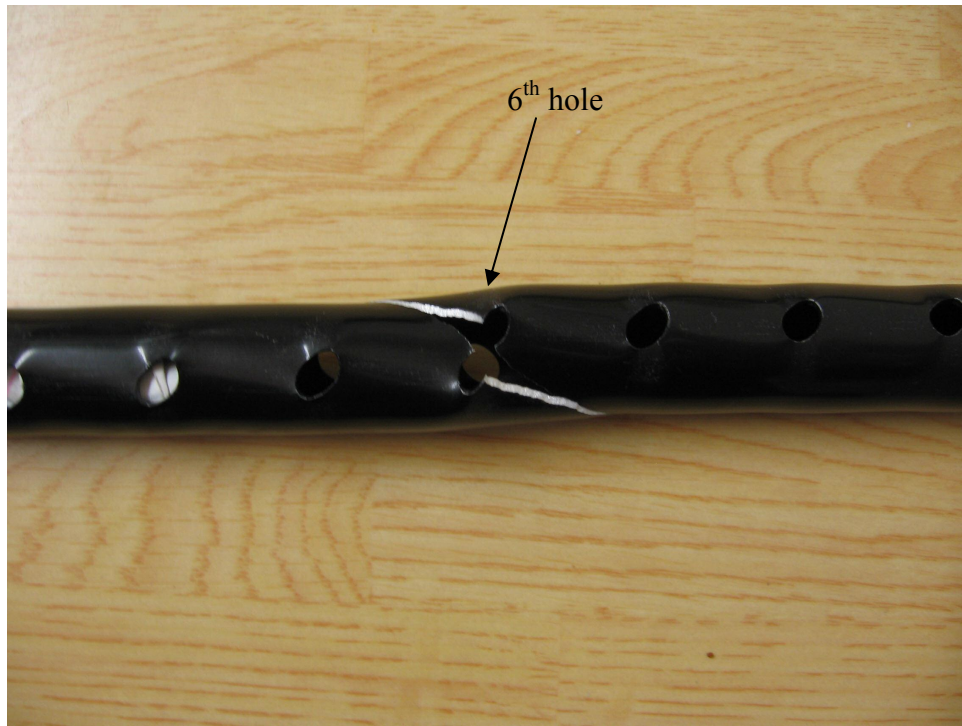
Fracture surface of test specimen 1 (Figure 3.18), fractured at 360 degrees/min.
